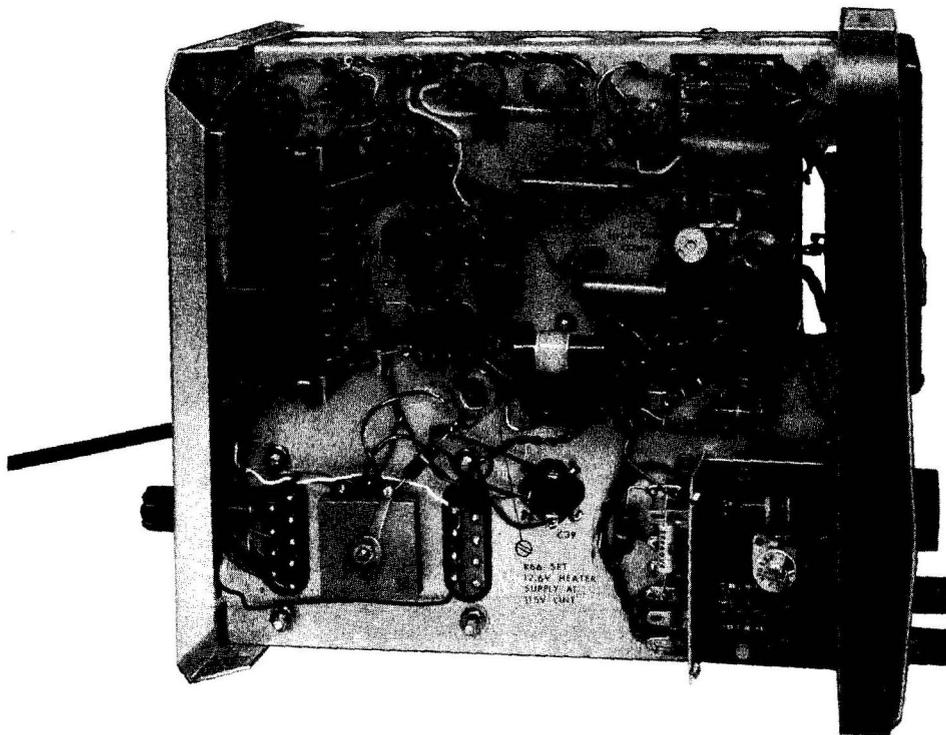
Right Side View of VTVM Chassis—Models Listed in 1.06
